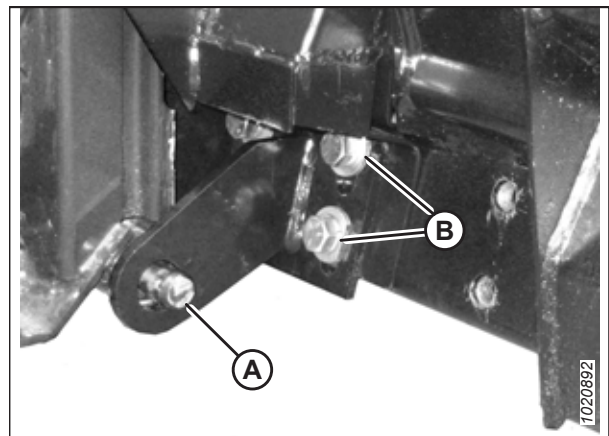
Feeder House Pin used on John Deere 60, 70, S, or T Series – X9 Series is Similar
